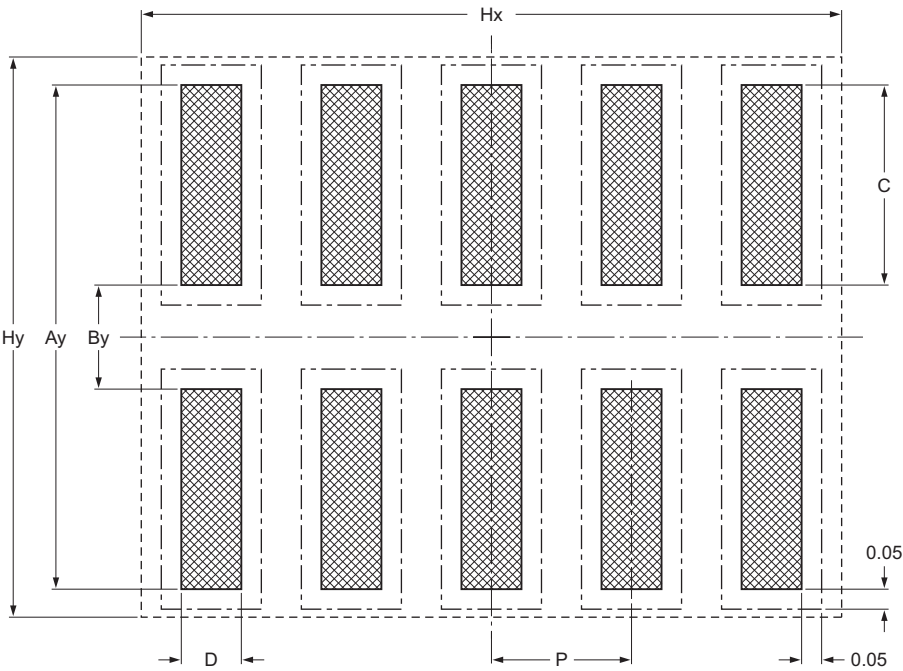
Reflow soldering footprint DFN2510-10 (SOT1165-1)
